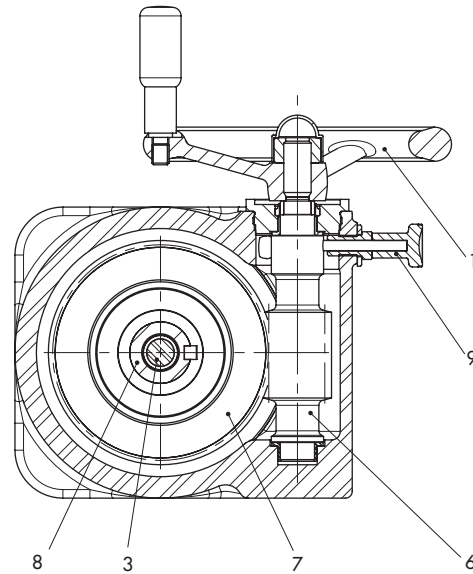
Sectional drawing of Type 3273 Side-mounted Handwheel, for up to 30 mm rated travel
